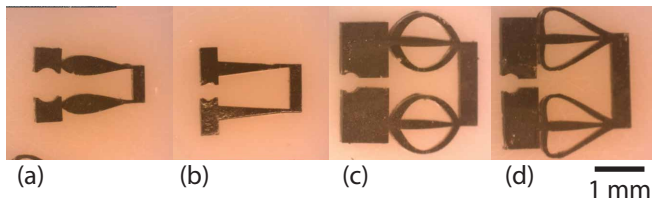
At-scale fabricated μ -grippers with optimized flexure designs.
